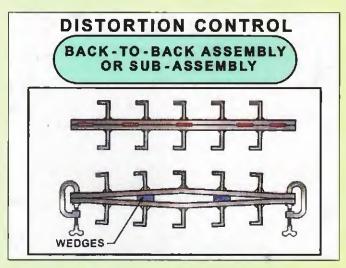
Restraints and back-to-back assembly can reduce distortion, and can be combined with prebending.
